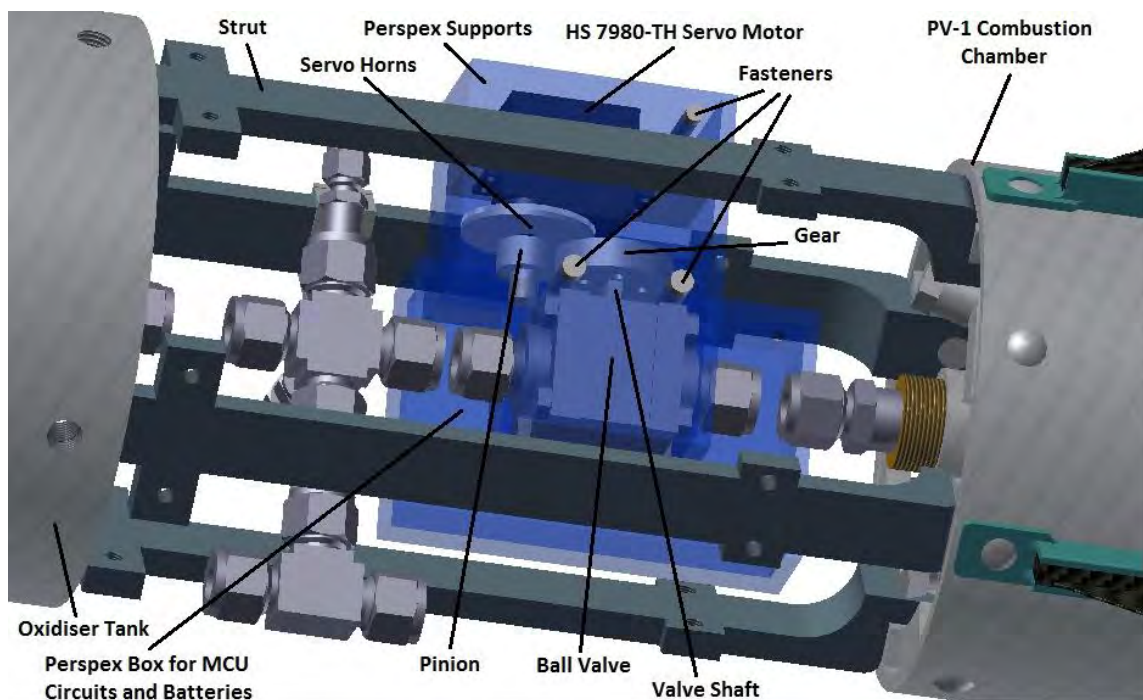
CAD assembly rendition of the oxidizer flow control system showing the servo actuation mechanism and the location of the control circuitry and batteries.
